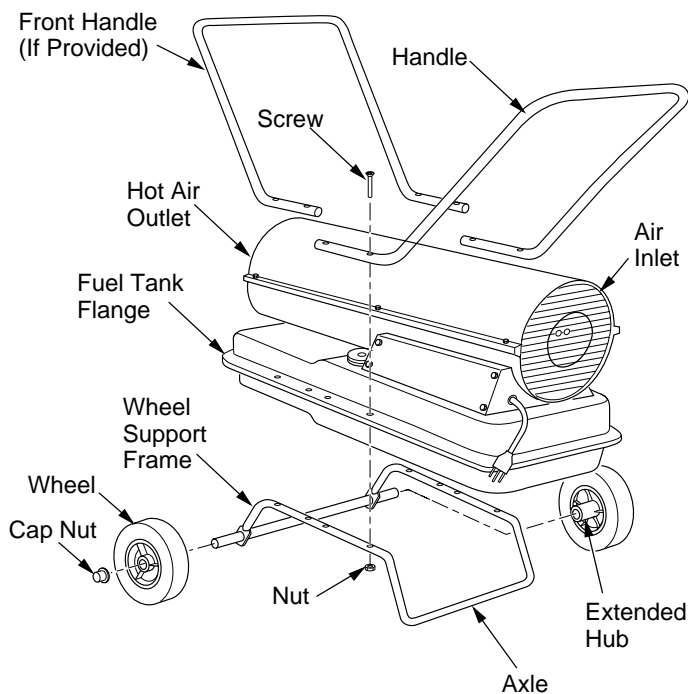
Wheel and Handle Assembly, 110/115/155/165/200 Models Only
